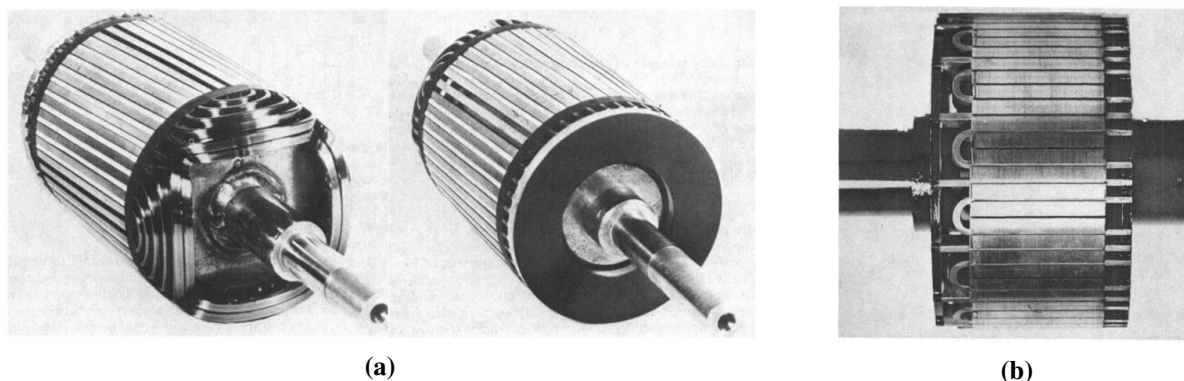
Broadway & Burbridge rotors (a) Graded winding rotor for (6 + 2) poles machine, (b) Multicircuit rotor for (18 + 12) poles machine [38].
